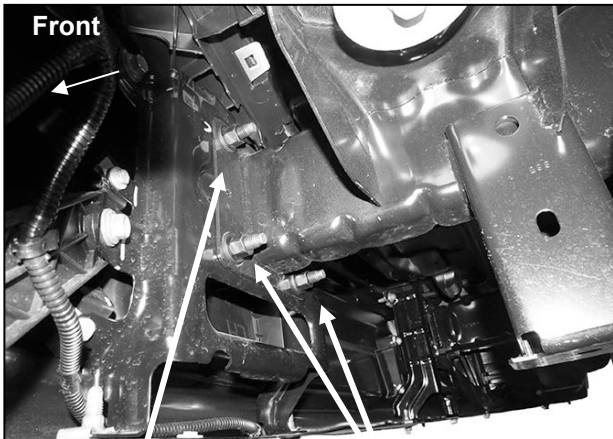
Unplug lights and sensors if equipped. Unplug harness to bumper and move harness
